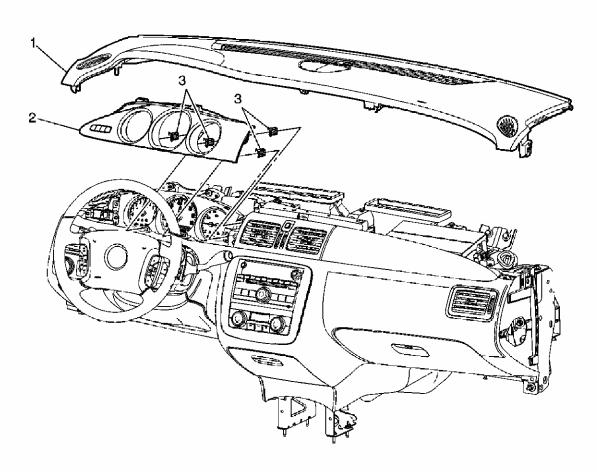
Identifying Instrument Panel Cluster Trim Plate Bezel Courtesy of GENERAL MOTORS CORP.
